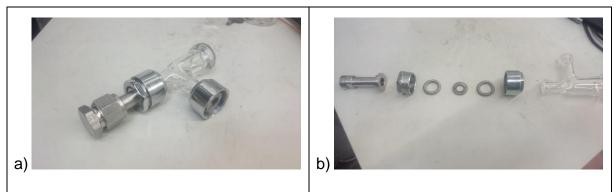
Glass-metal-joint; a) assembled, and b) dissembled
